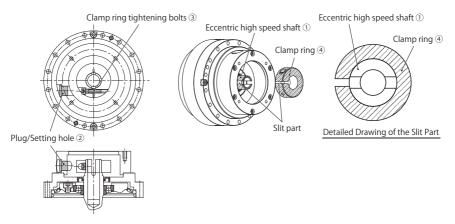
Motor Assembly Procedure (Models With Motor Adapter)
